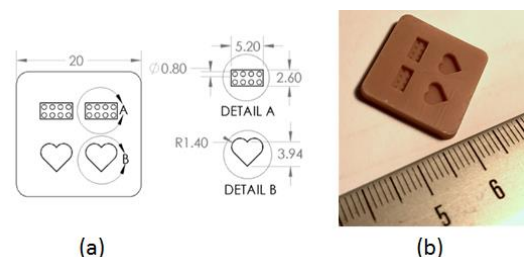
(a) insert drawing (dimensions in mm) (b) AM insert.
